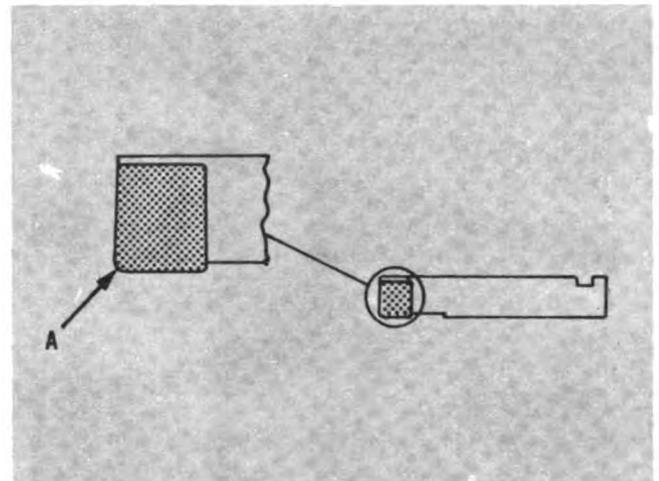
(N20148). Counterbore Tool Bit Radius.
